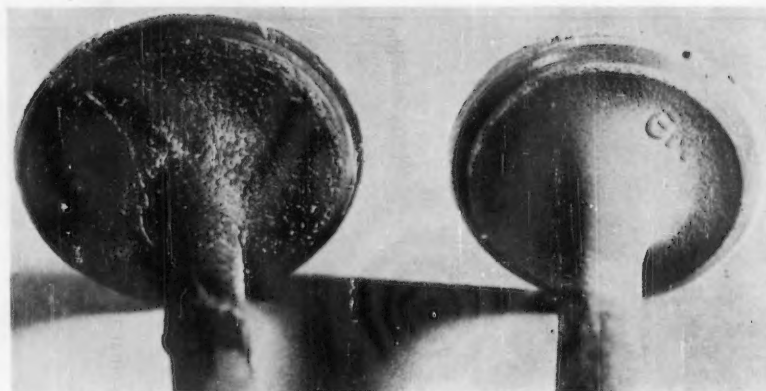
Intake Valve (left) and Exhaust Valve (right) from FL-2 Engine Test.
